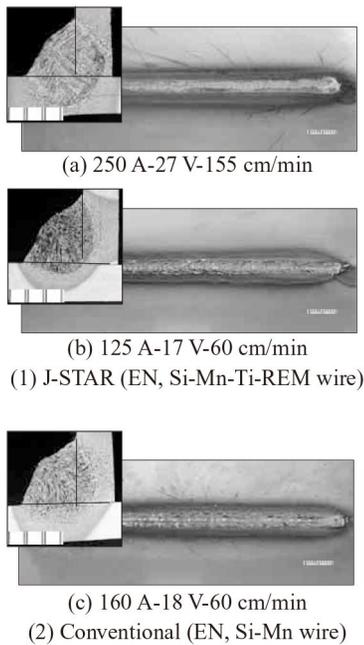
Welding bead appearance and cross-sectional macroscopic organization
